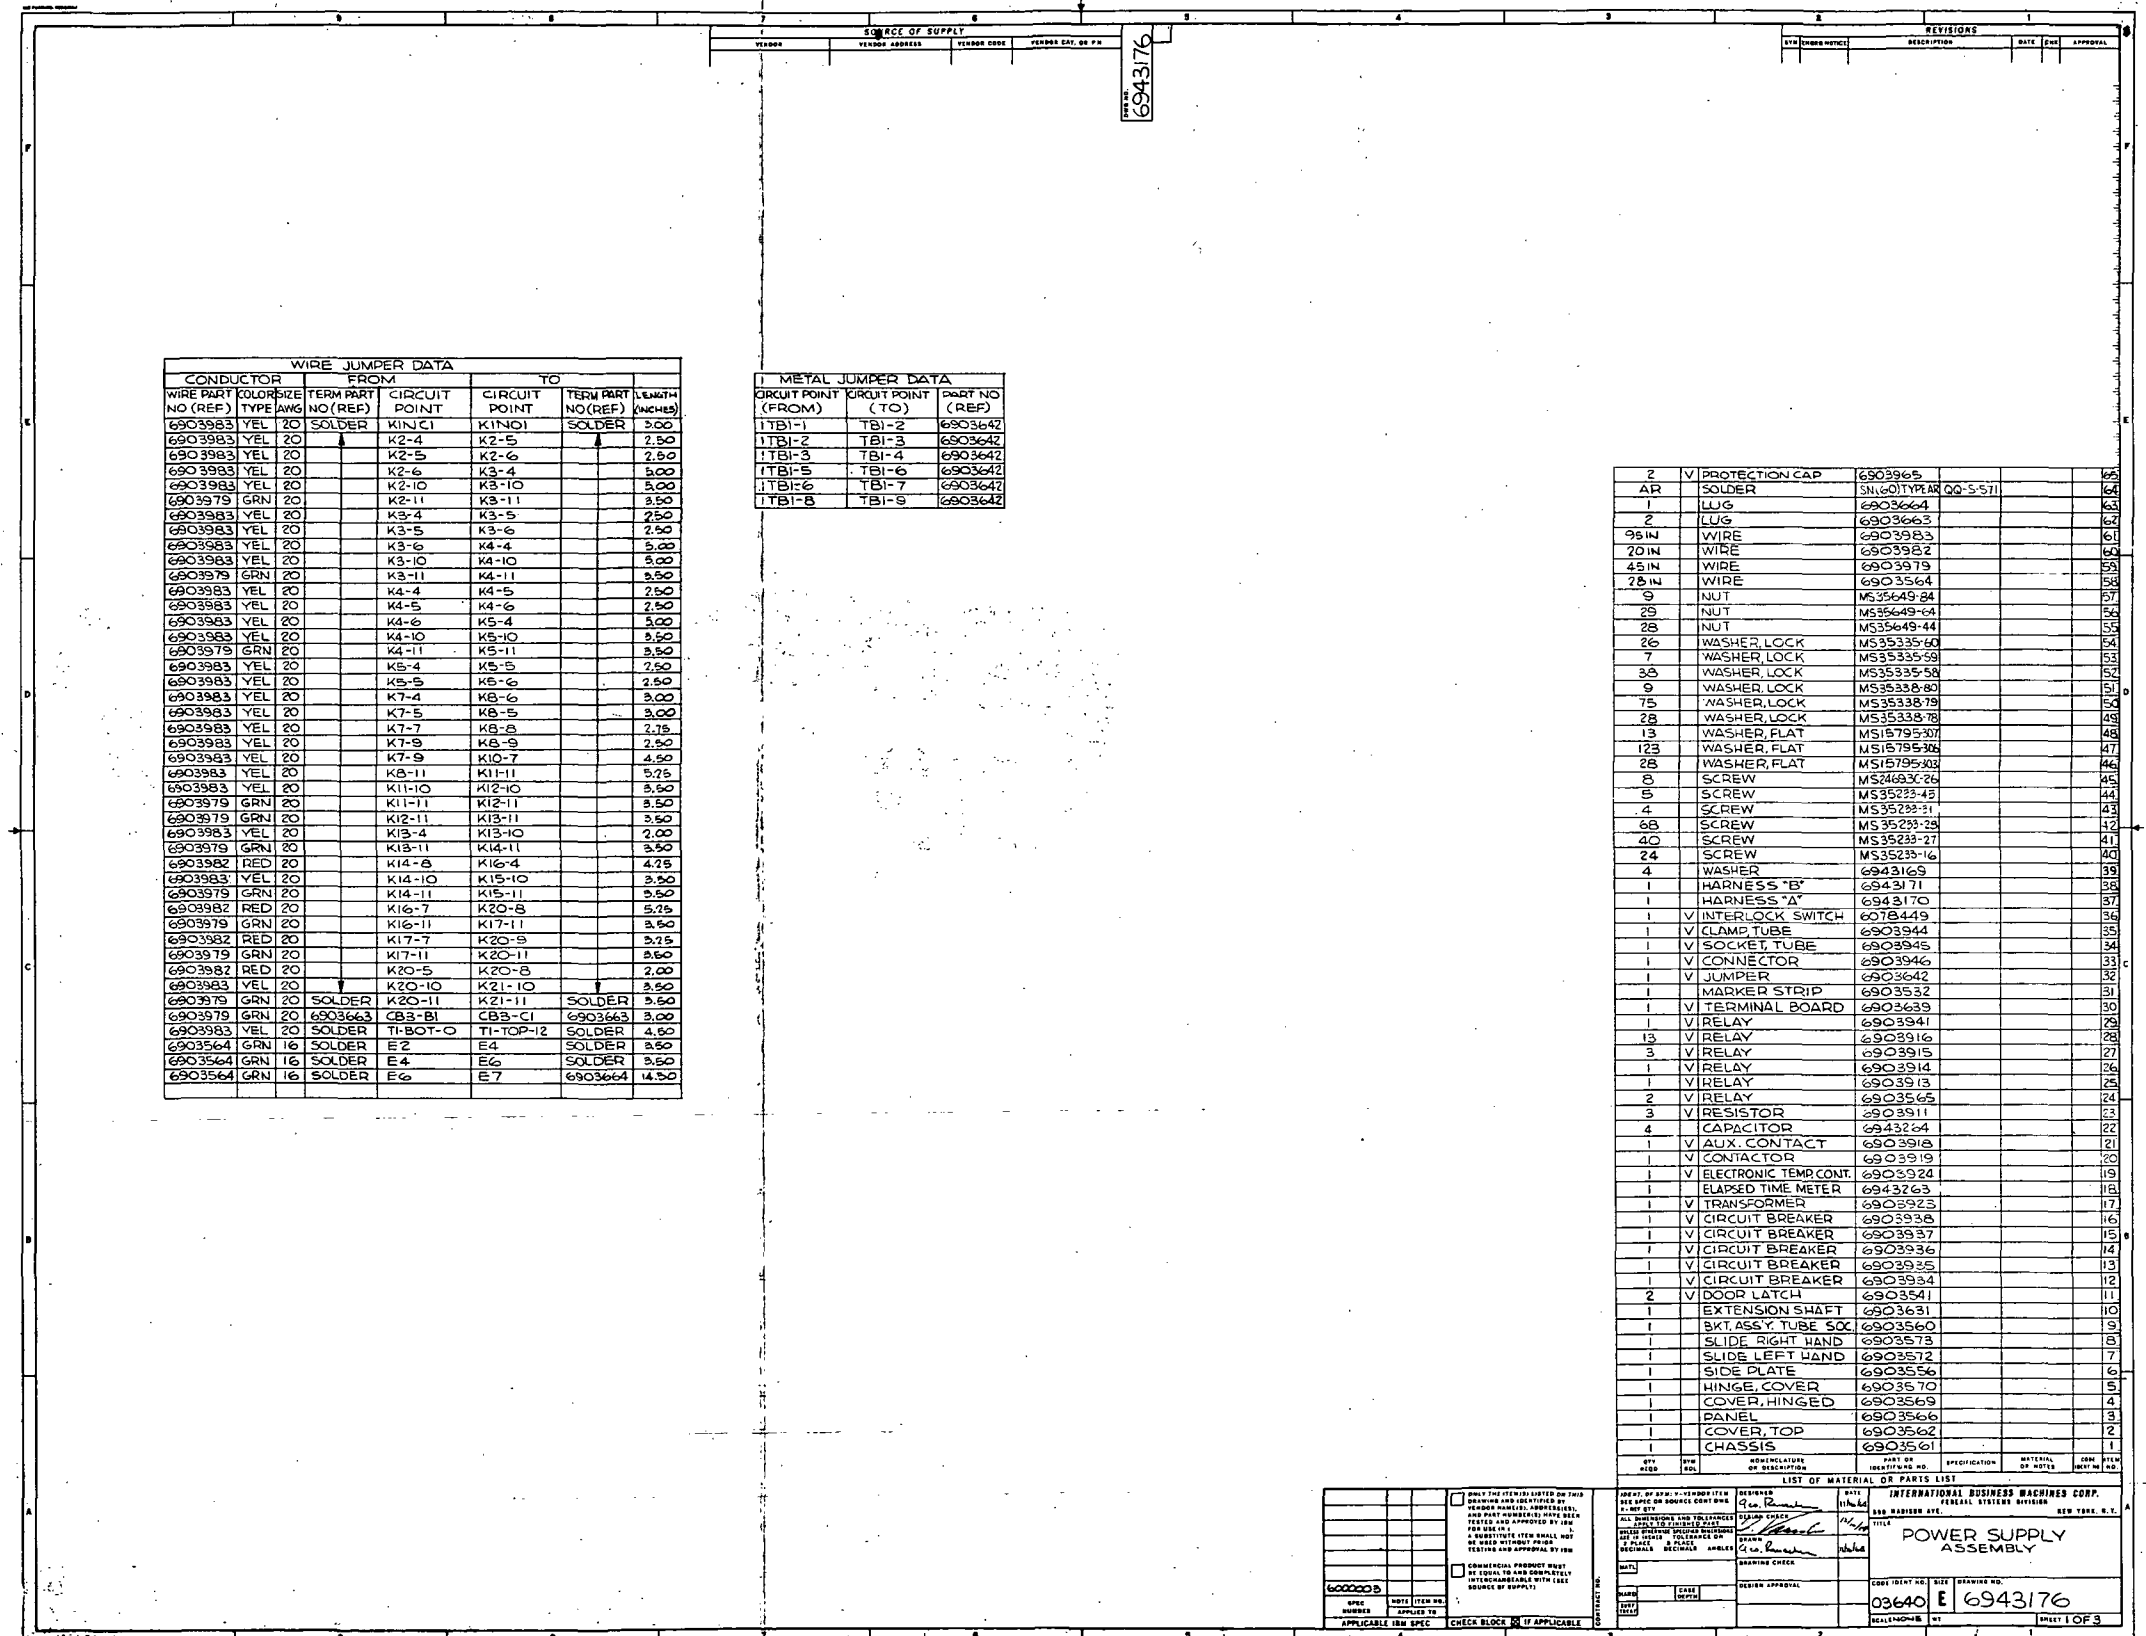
Temperature Modulator Power Box Assembly (6943176) Assembly Diagram (Sheet 3)
